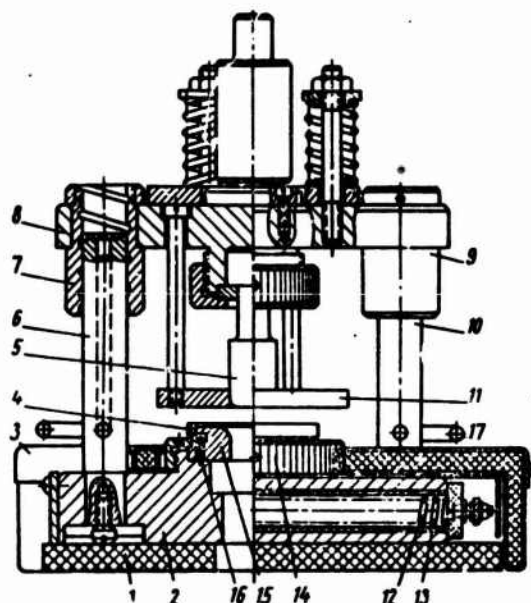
Press for drawing parts with preheating: 1) asbestos cement packing; 2) lower plate; 3) shell; 4) locator; 5) punch; 6 and 10) columns; 7 and 9) guide bushings; 8) upper plate; 11) pressing device; 12) coil; 13) insulator; 14) nut; 15) die; 16) screw for attaching thermocouples; 17) pipeline.
